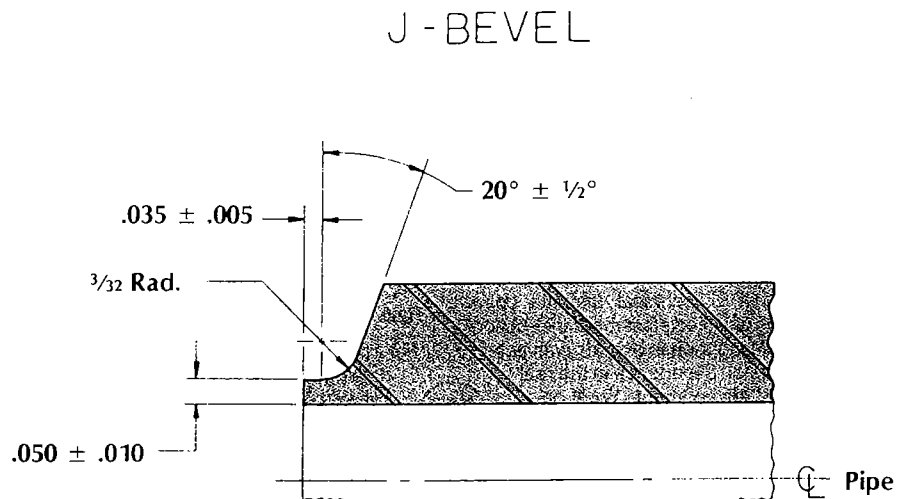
Typical joint design used in orbital mechanized welding of furnace tubes.
